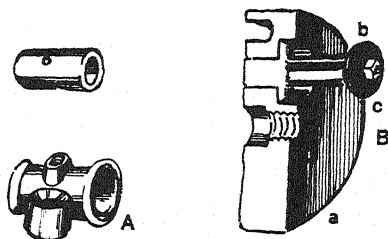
Crank-shaft bushing, pitman box (A); cross section of crank wheel and wrist pin.
